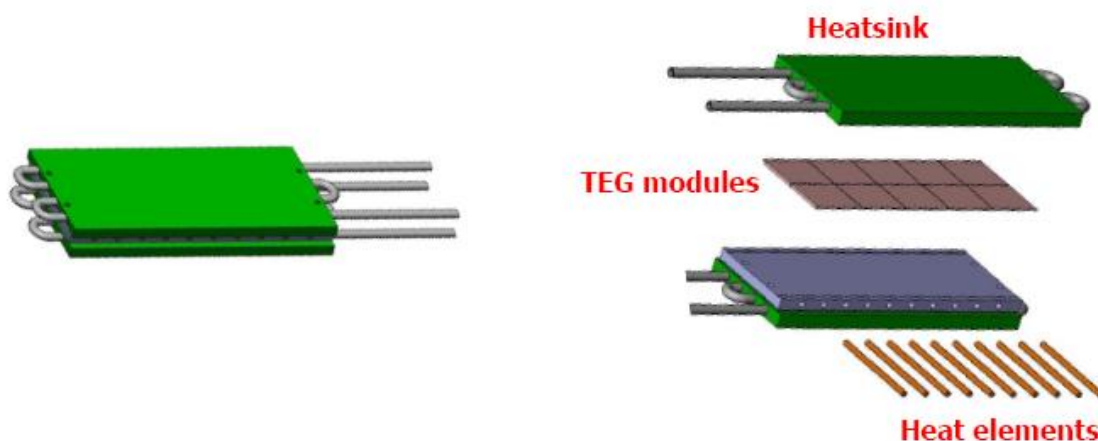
Bismuth telluride 100 W TEG (final assembly on the left, decomposed assembly on the right)
